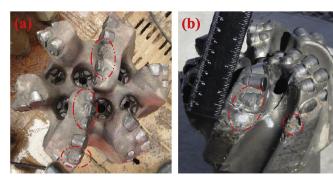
Failure photographs of PDC bit. (a) tooth fracture, (b) tooth loss.
